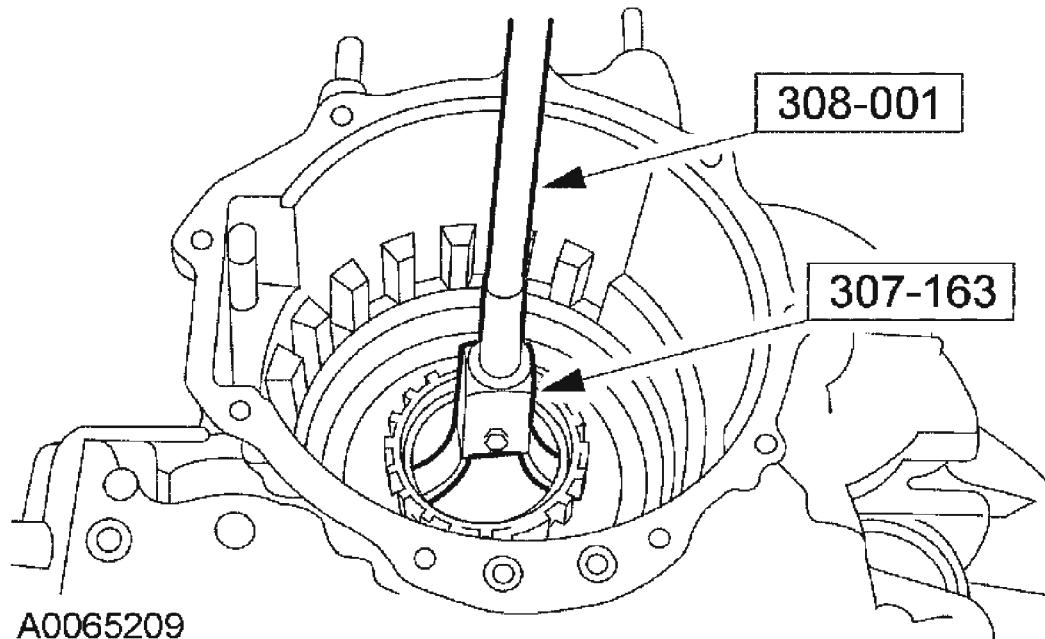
Removing Final Drive Input Gear Bearing Cup Using Special Tool
